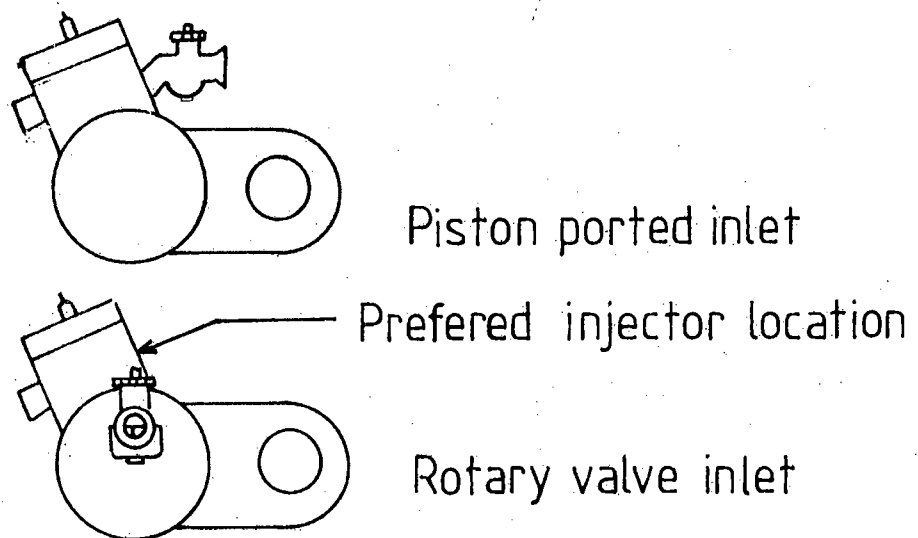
Carburettor Locations for Piston Ported and Rotary Valve Engines.
